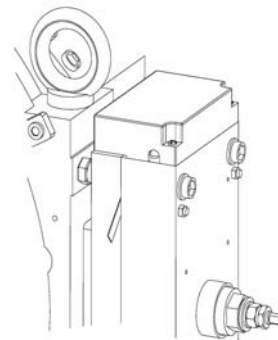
Detecting the air gap between rotor and magnetic yoke with a feeler gauge
